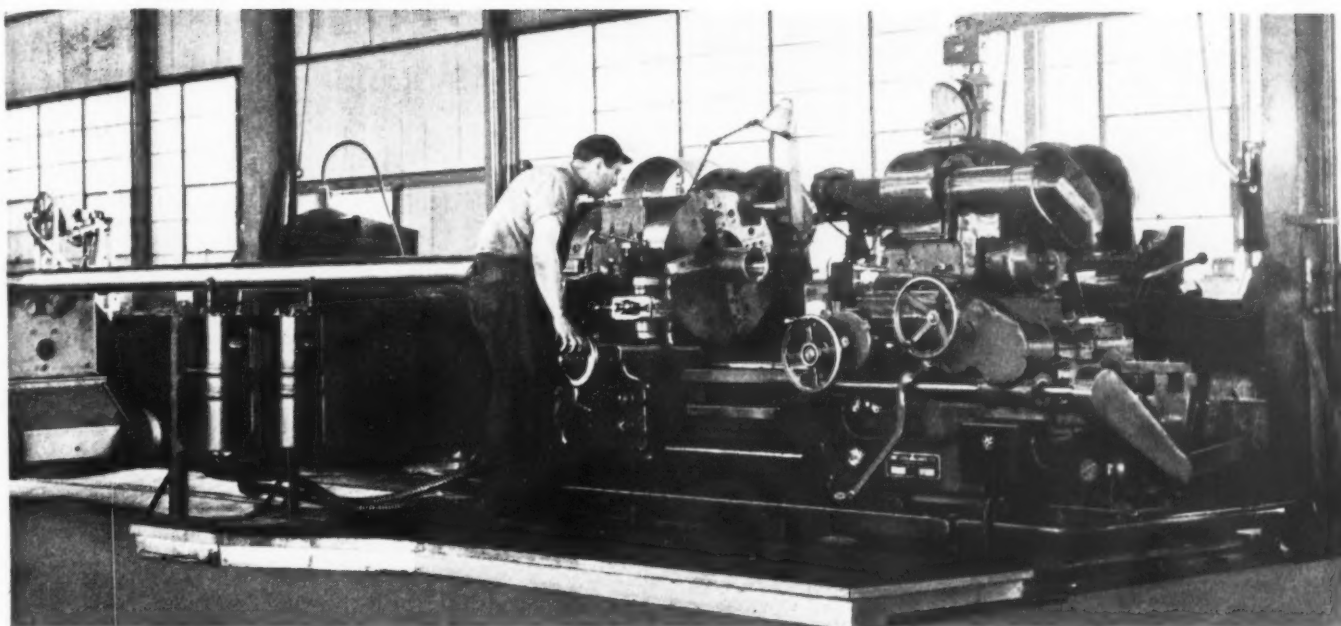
Machine Employed for Milling the Tapered Thread in Both Ends of the Long Drill Collars
